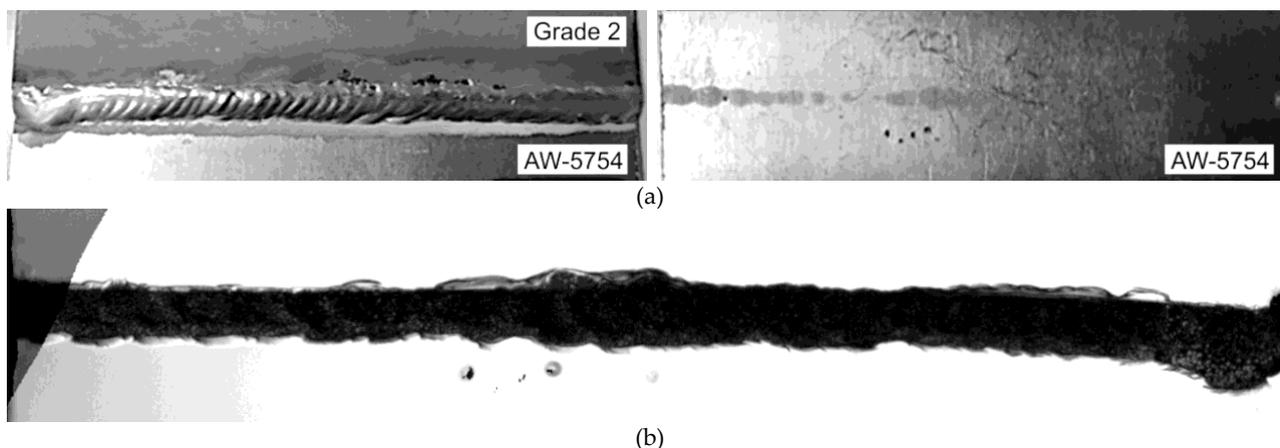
Braze welded joint Titanium Grade 2 + aluminum AW-5754, brazing consumable AlSi12: a) both sides of the joint; b) C-scan of the joint
